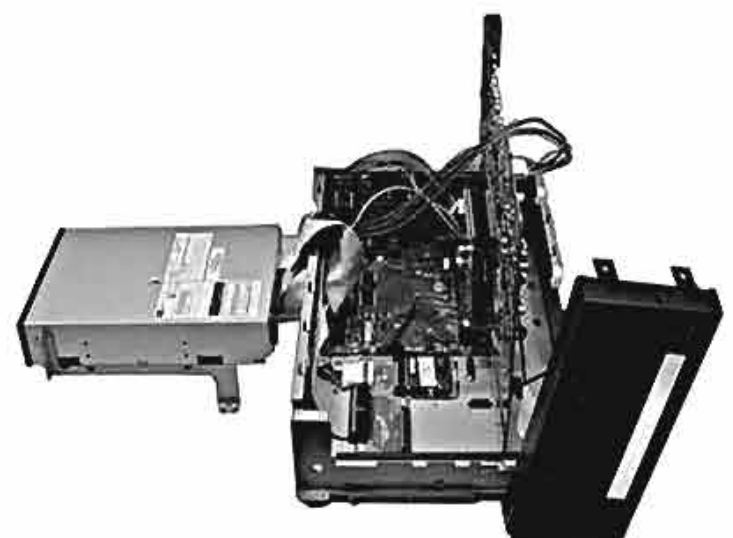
DVD Extension board assembly (KLJ0350)
